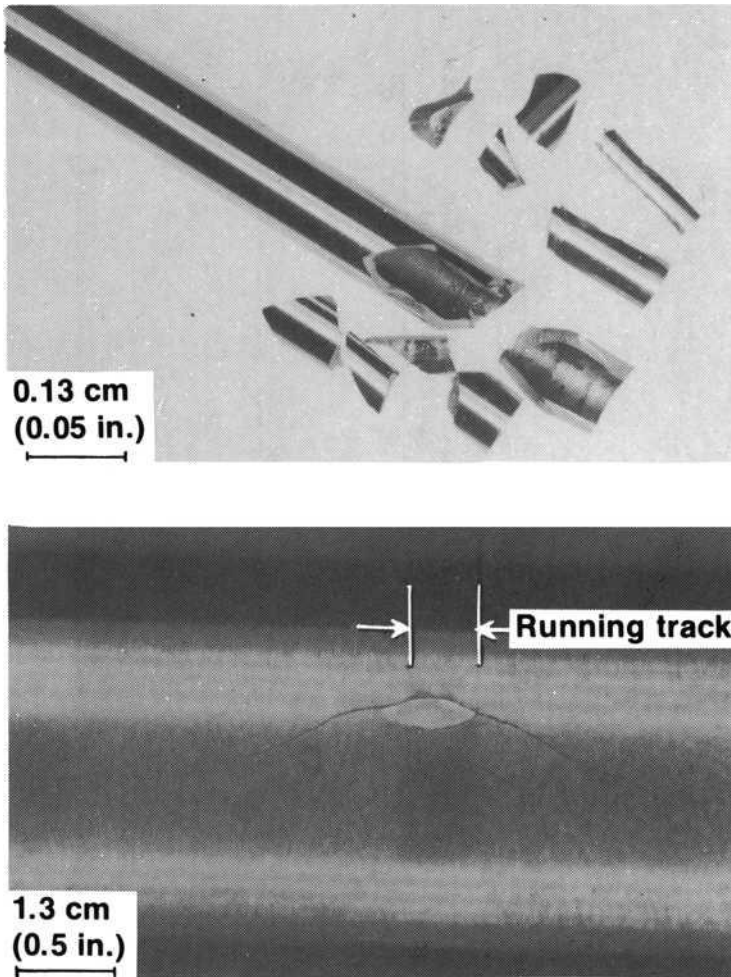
Typical flexural fatigue failures of hollow test bars. (Top) Fracture of hollow test bar due to flexural fatigue; (bottom) the failure appearance on the bar surface was sensed early, and the test was terminated before total fracture occurred.
